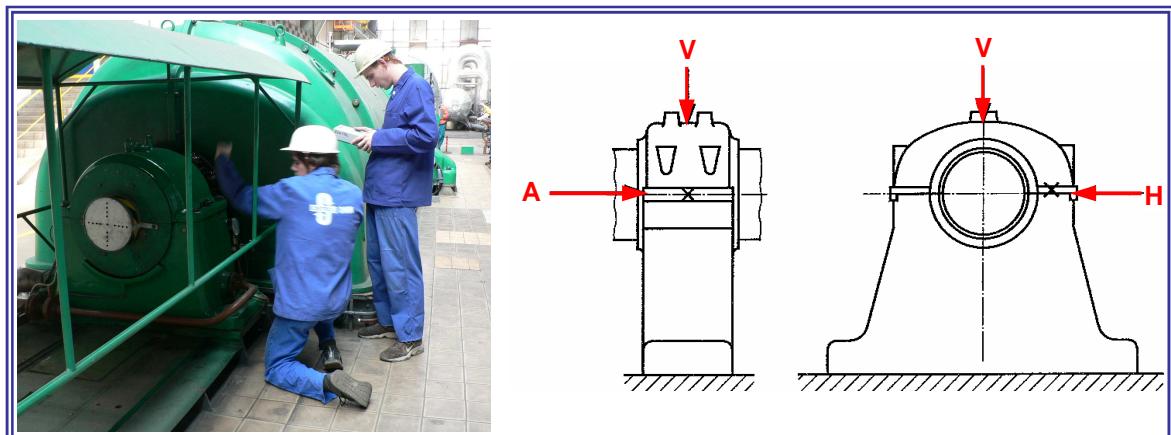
Selecting Measurement Points and Directions on the Machine
